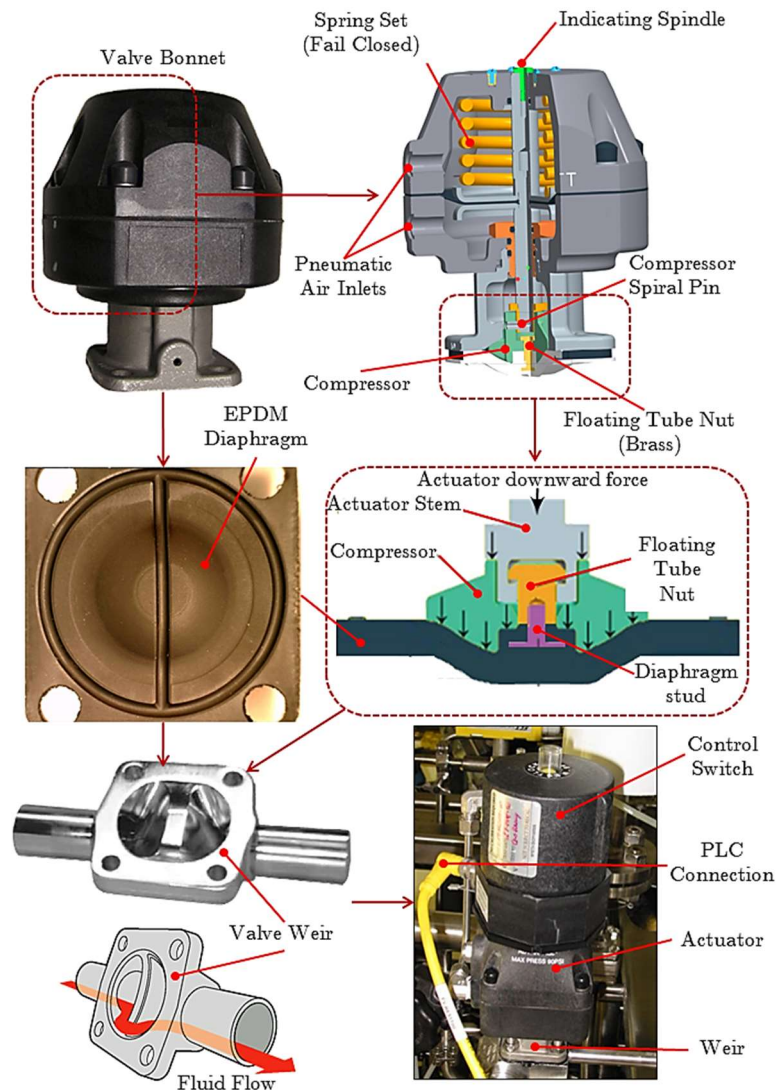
Diaphragm valve assembly. Adapted from [292]
